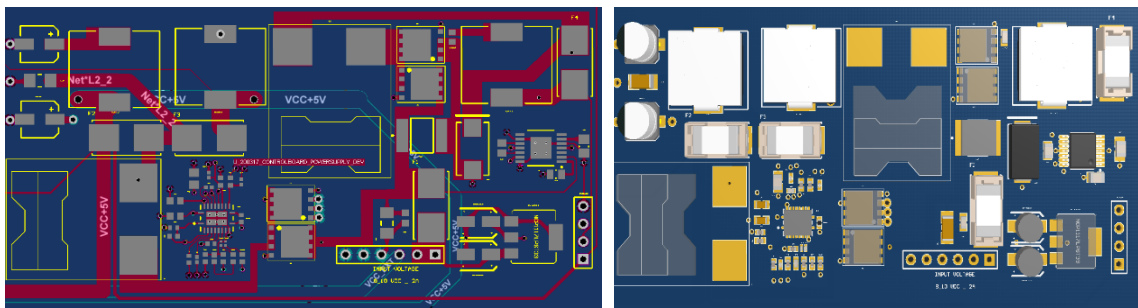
(A) Power Supply Final Layout (B) Power Supply 3D View
